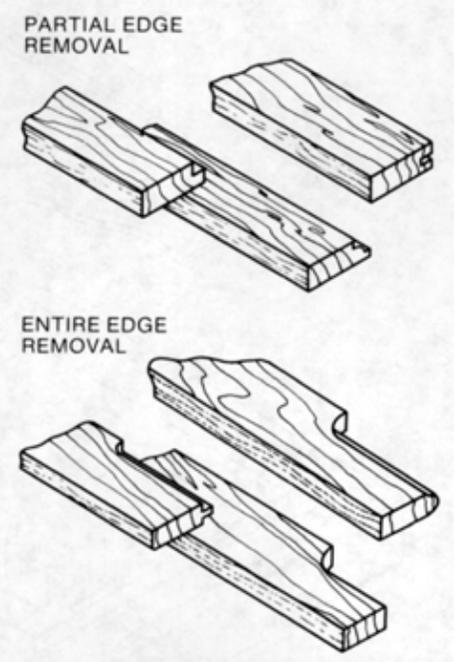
Shaper cuts can remove part of or the entire edge of the workpiece. Note: Depth of cut exaggerated for clarity.
